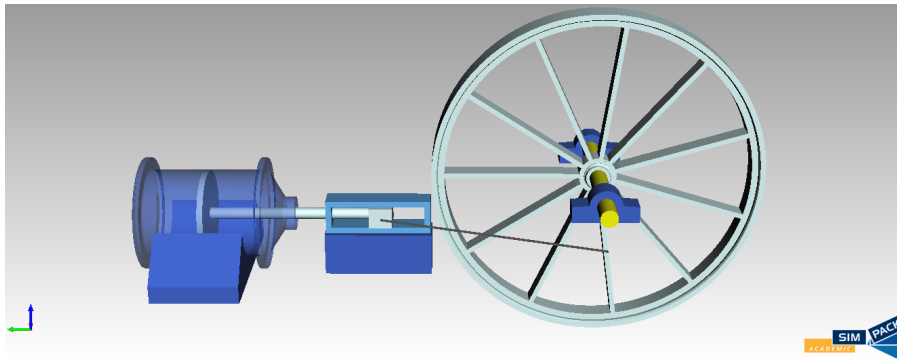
Slider Crank with flexible connecting rod in Simpack
